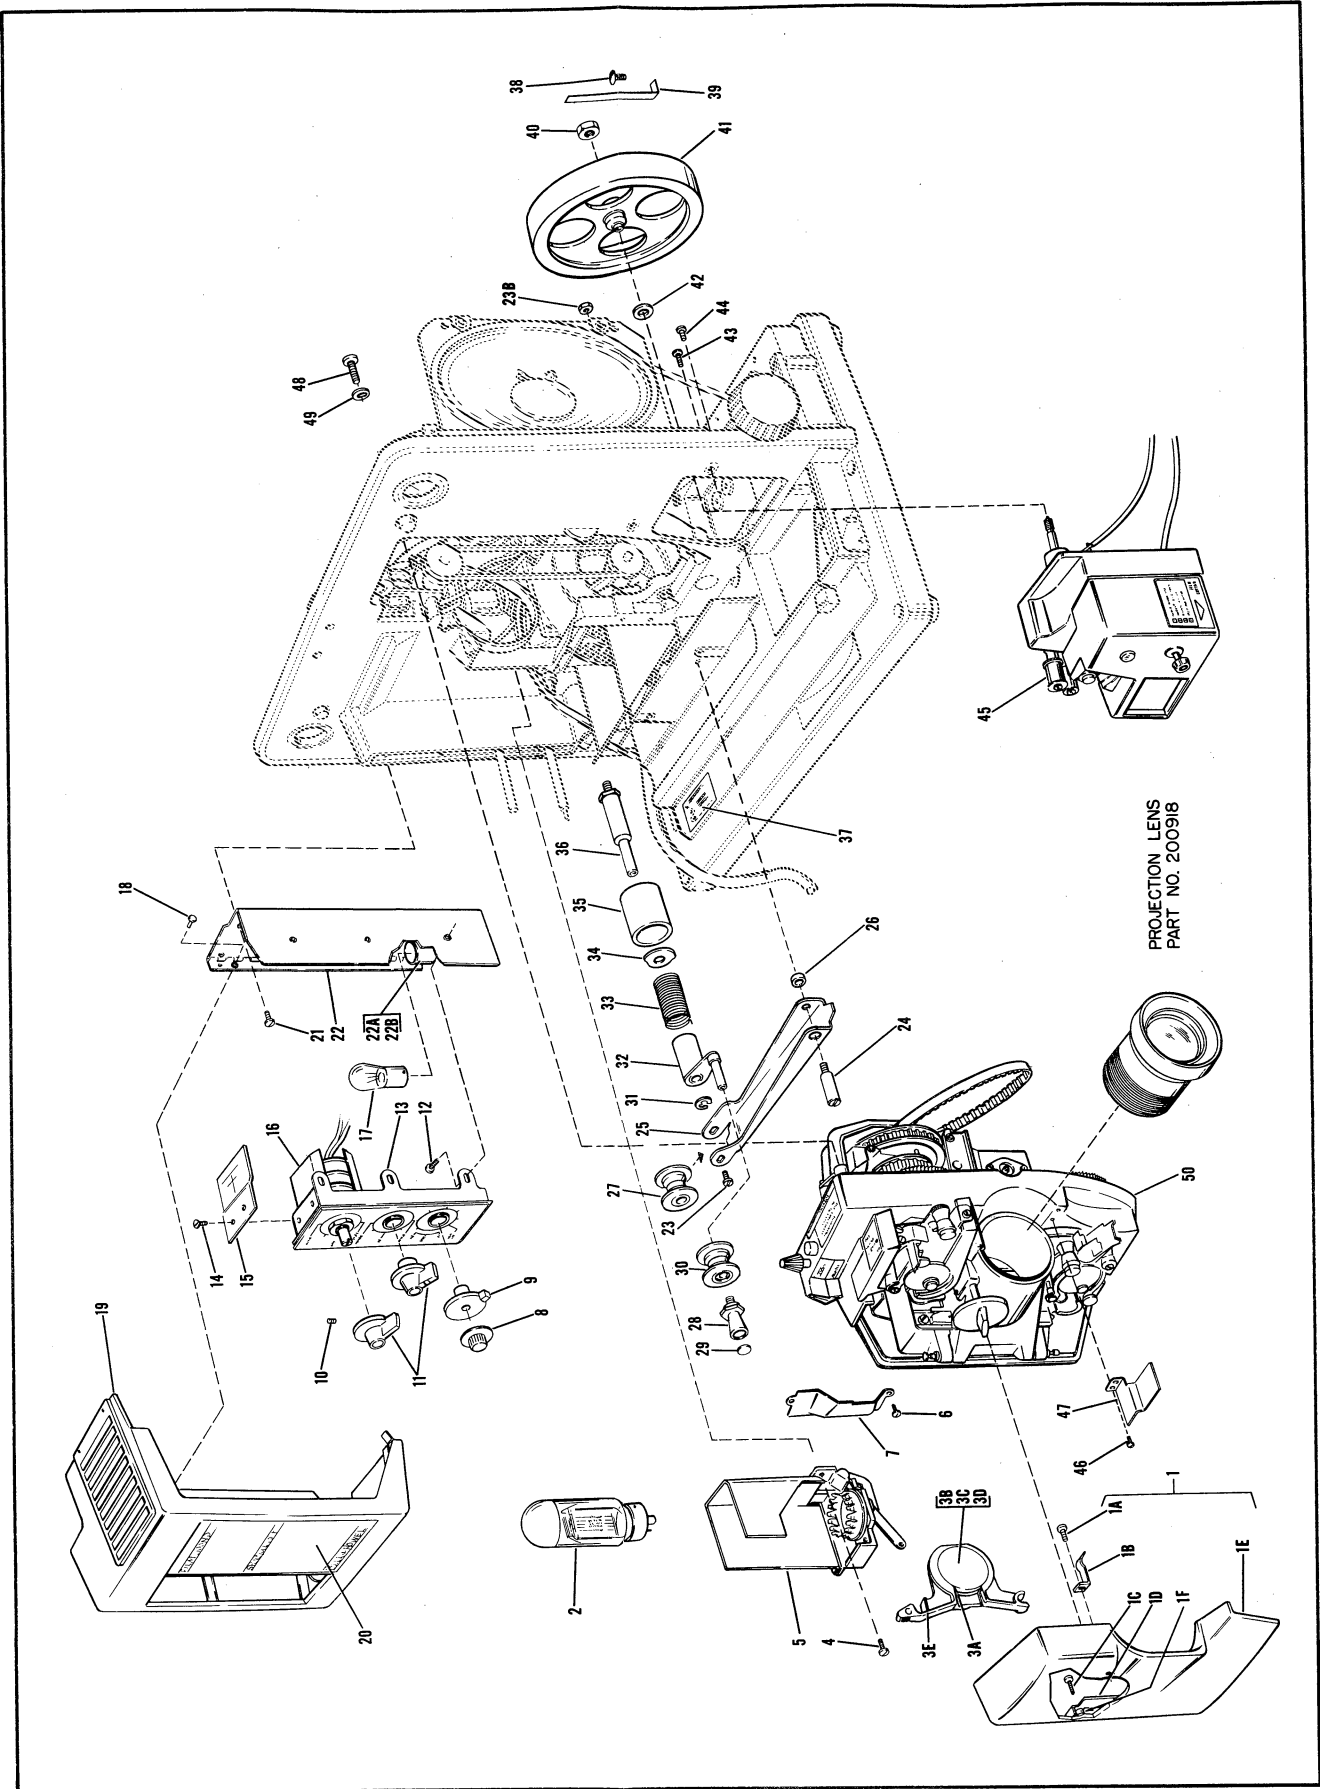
Filmosound Projector Main Plate Exploded (Sheet 2)
